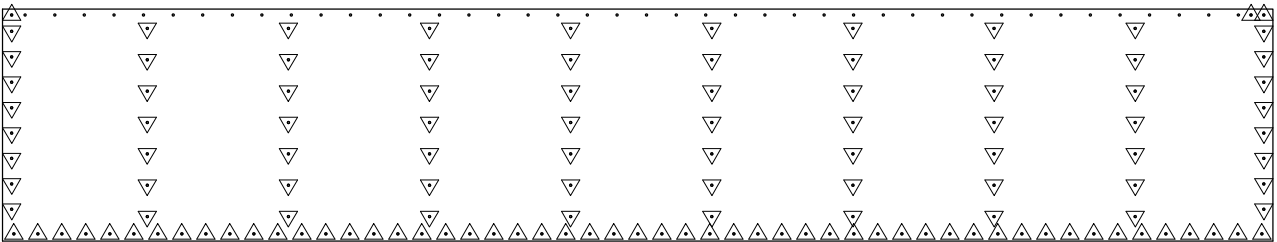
A-1001B-1 TOP SKIN RIVETS
